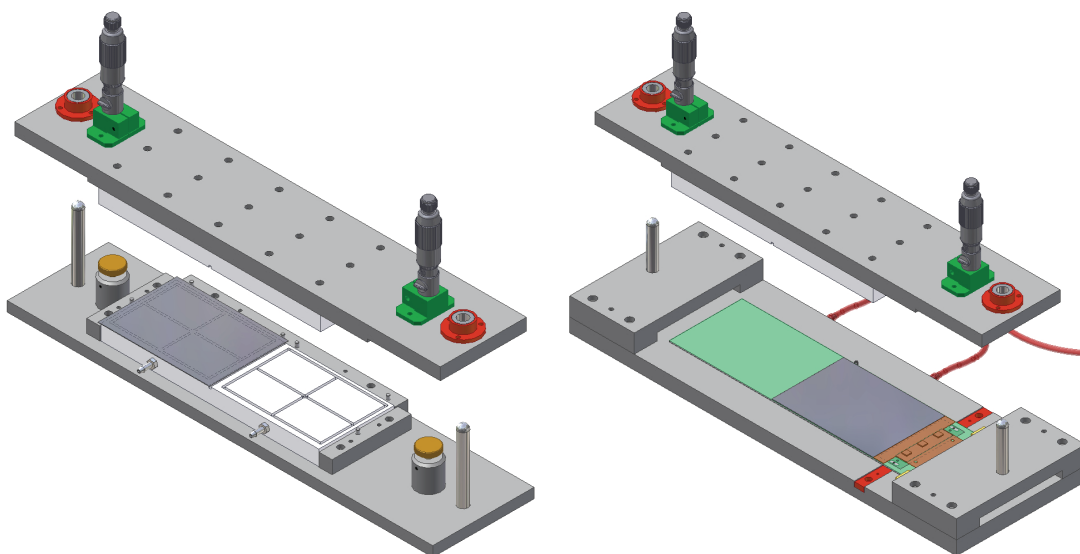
Pictures of the transfert jig (left) and the gluing jig (right).
